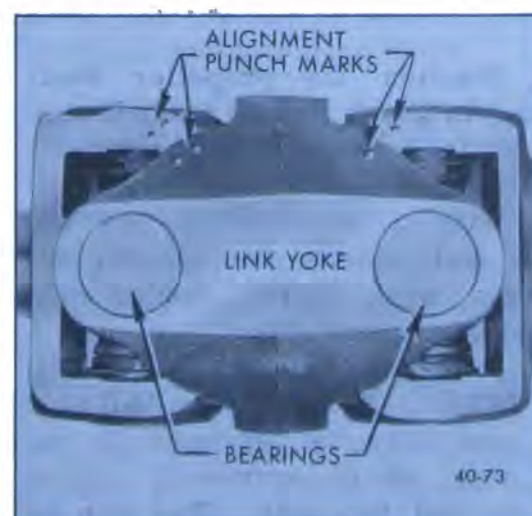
Link Yoke Showing Alignment Punch Marks
